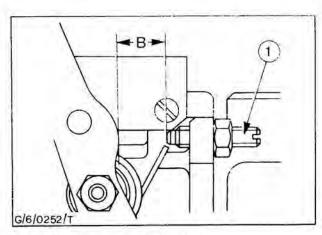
Adjust maximum speed setting 1. Adjustment screw
